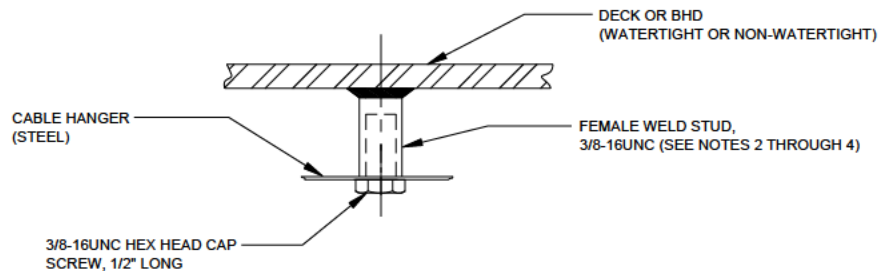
C18. Top loading hanger on steel and aluminum decks and bulkheads (four cables).
